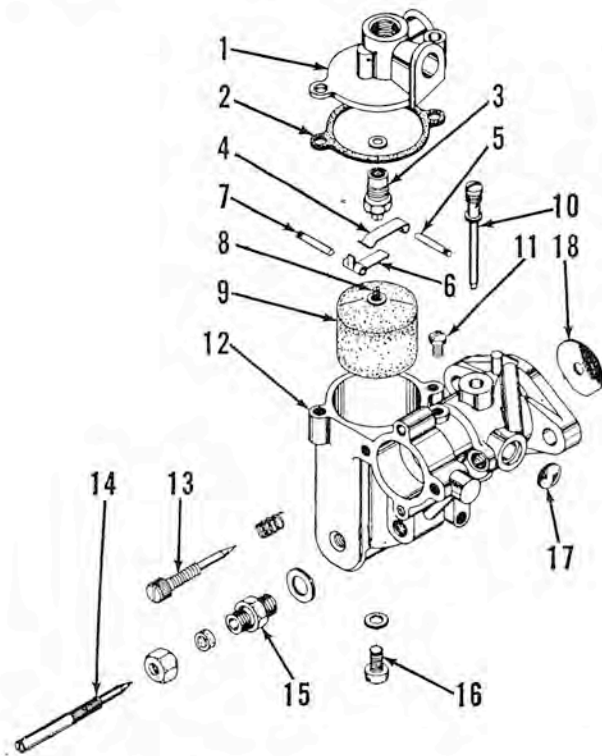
Exploded view of Tillotson carburetor of the type used on all models.
